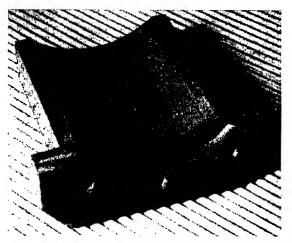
A ONE-PIECE BAKELITE LAMINATED HALF-BEARING
